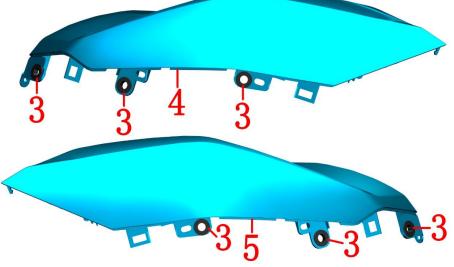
FUEL TANK HOUSING ASSEMBLY		Oil tank decorative cover component	CHK
